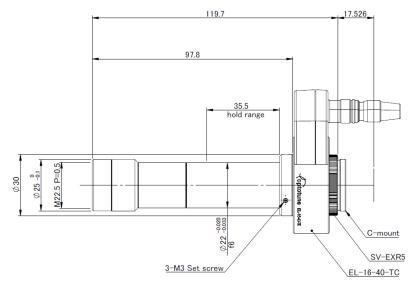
Mechanical drawing of the VS-TCH6-65CO-LQL1
